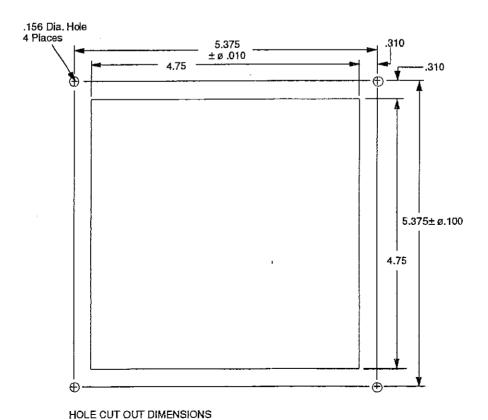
TCS-310 Meter Assembly Outline and Dimensions
